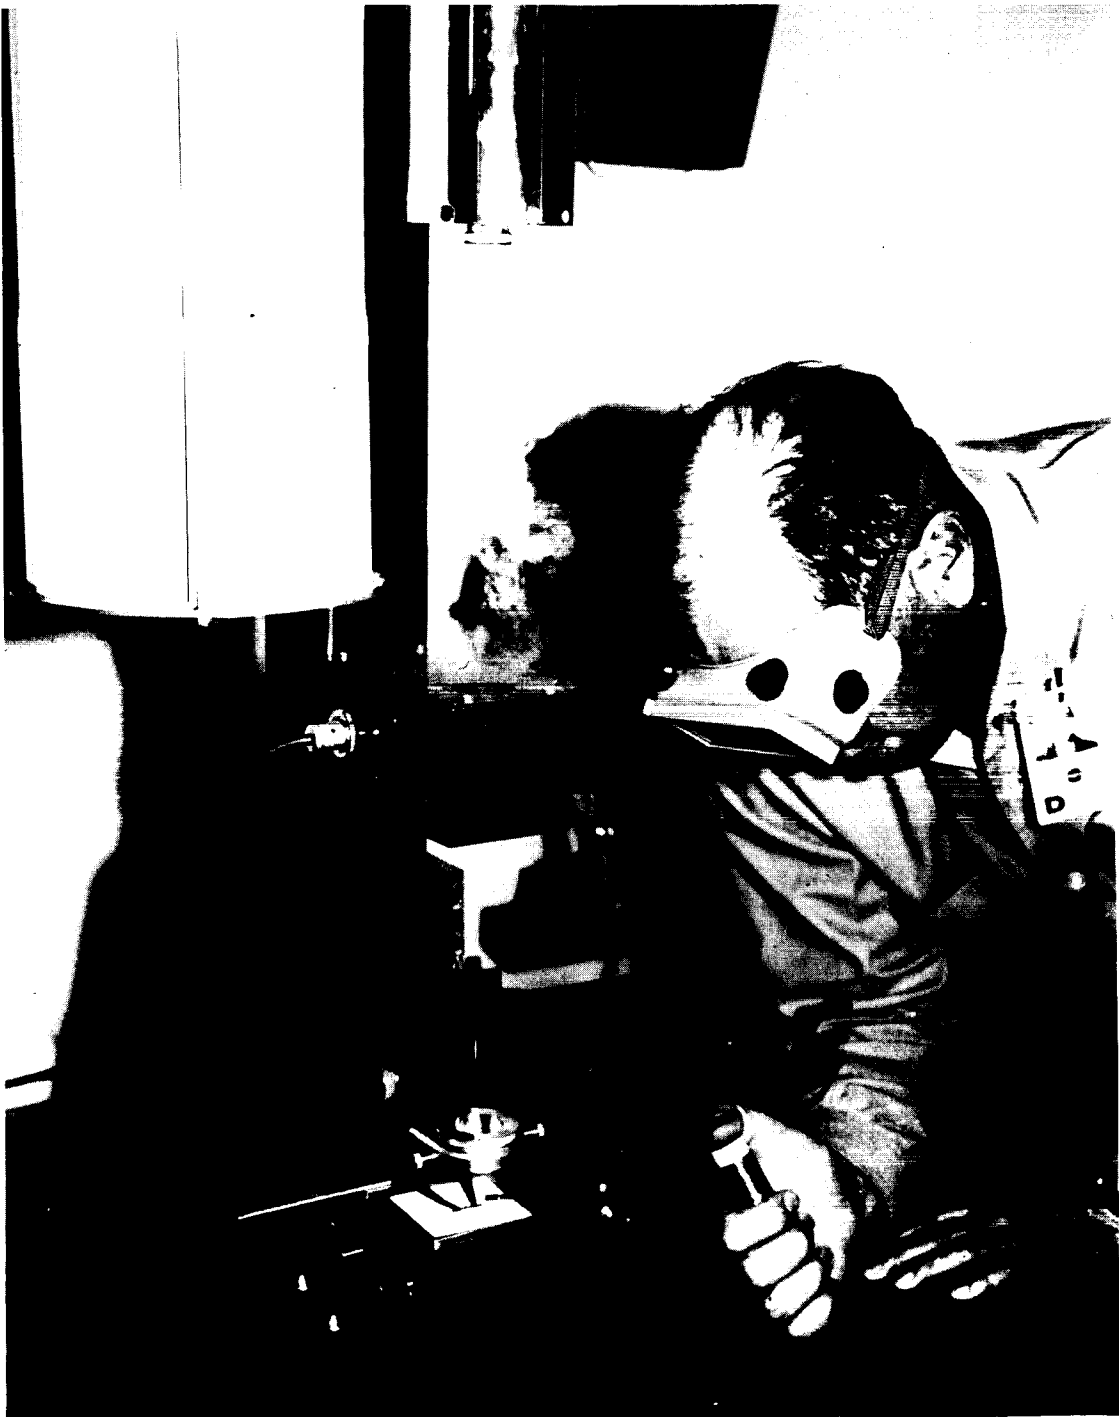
4000 J PULSED LASER WELDING 304 STAINLESS STEEL
